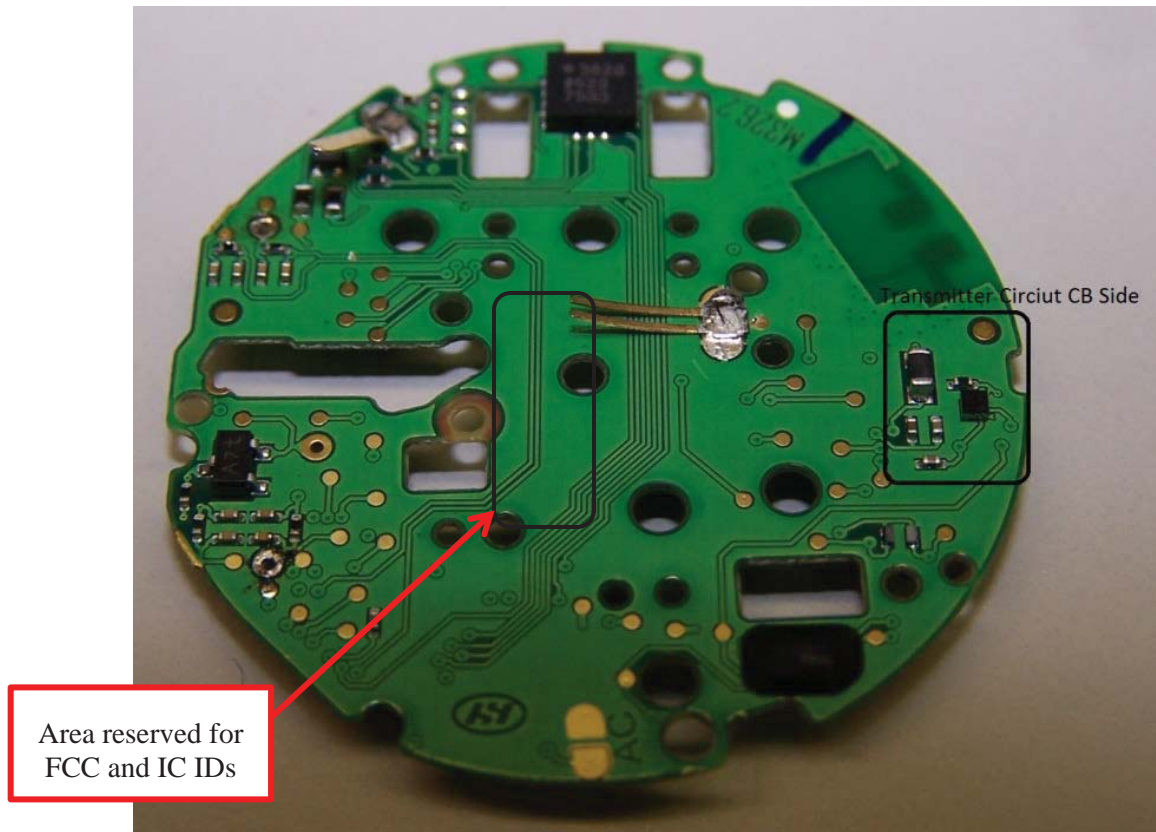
Case-Back View of PCB with the Limited Modular transmitter section shown on a typical watch circuit board.
